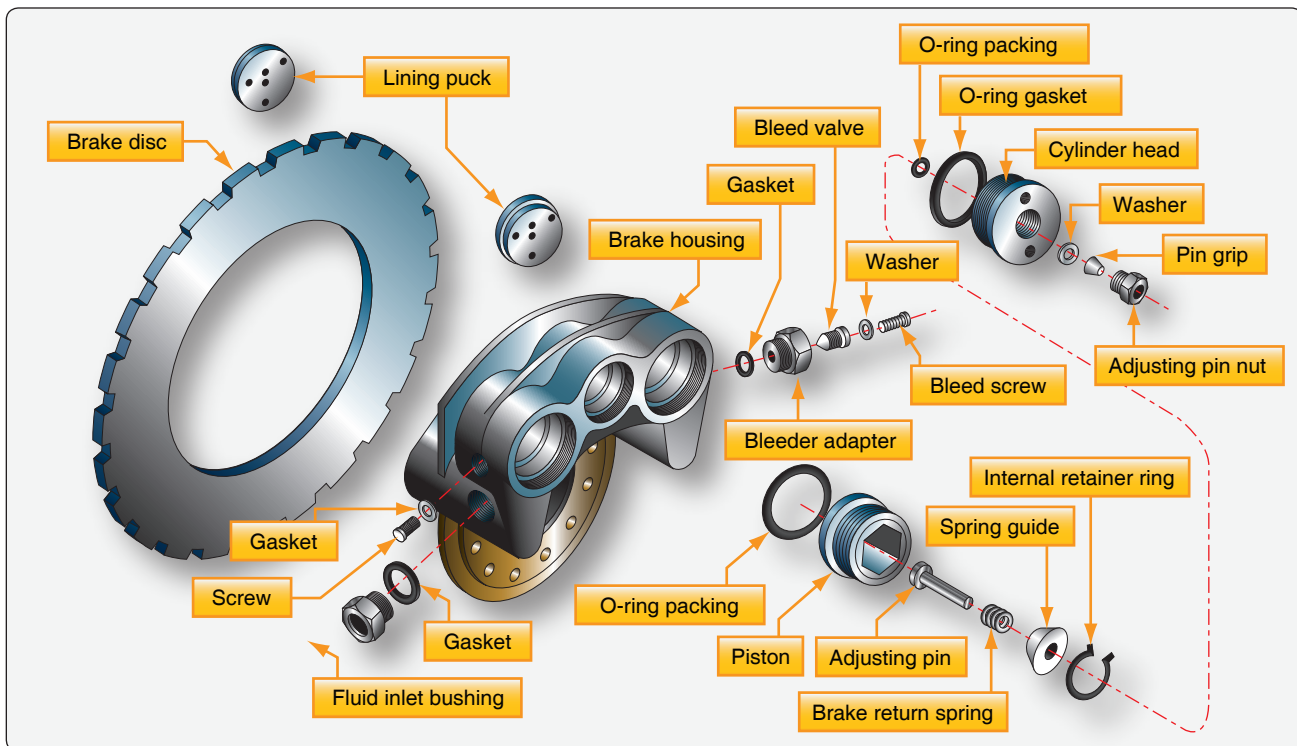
An exploded view of a single-disc brake assembly found on a light aircraft.
